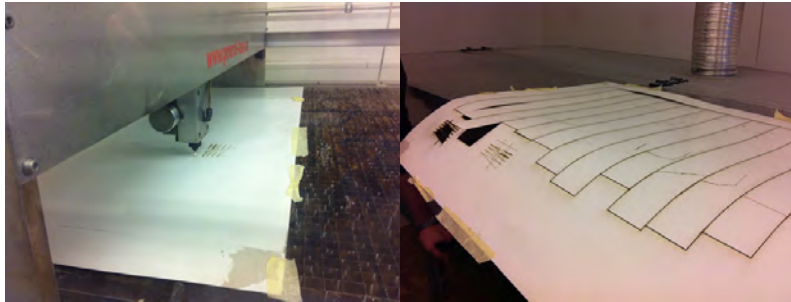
The laser cutter engraving the test layer (left); the laser-cut sheet of cardboard (right).
